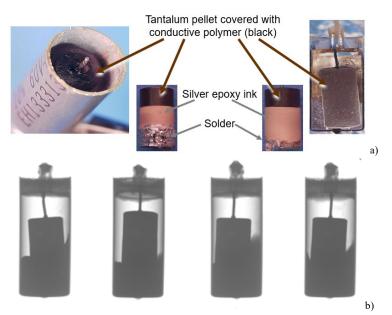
Design of a PTC in a hermetic metal case (a) and examples of X-ray views (b) showing solder distribution and possible misalignment. Note that this design is similar to MnO2 capacitors manufactured per MIL-PRF-39003, and most DPA requirements in MIL-STD-1580 are applicable.
